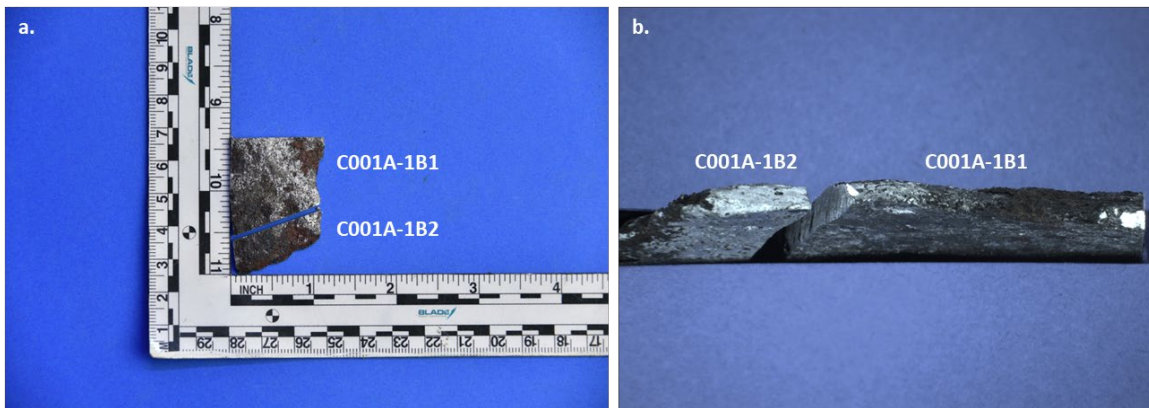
(a) Cut Specimens from C001A-1B, (b) Stereoscope Image of the Fracture Surface in C001A-1B1 and C001A-1B2
